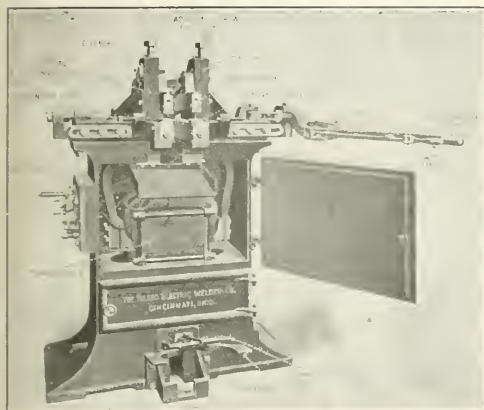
ELECTRIC BUTT WELDER
